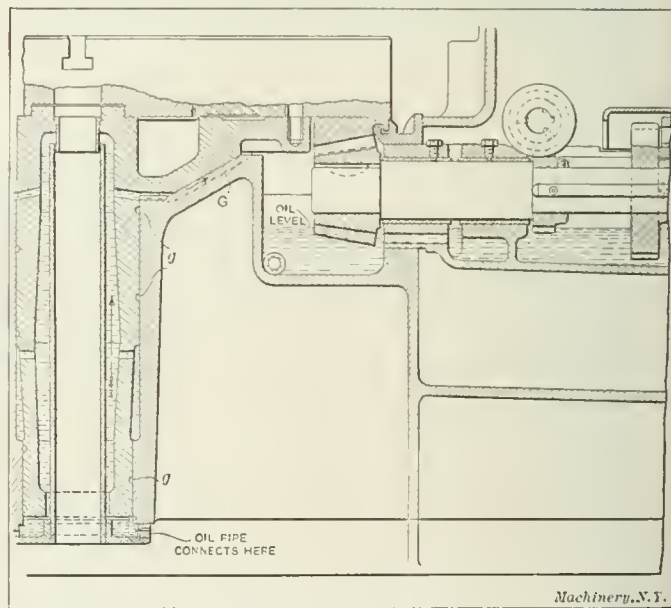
Sectional View Indicating Method of Lubricating Table Spindle and Driving Gears
